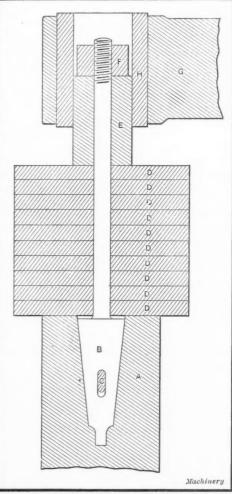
Details of Method of supporting Blanks on Special Arbor
